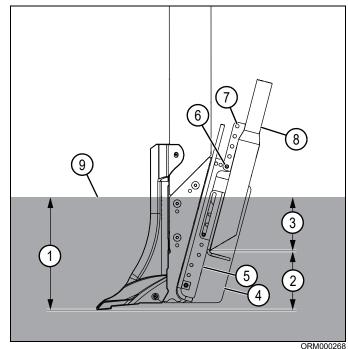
Adjustable Dry Fertilizer Boot on Mole Shank (wear plate removed for clarity)
